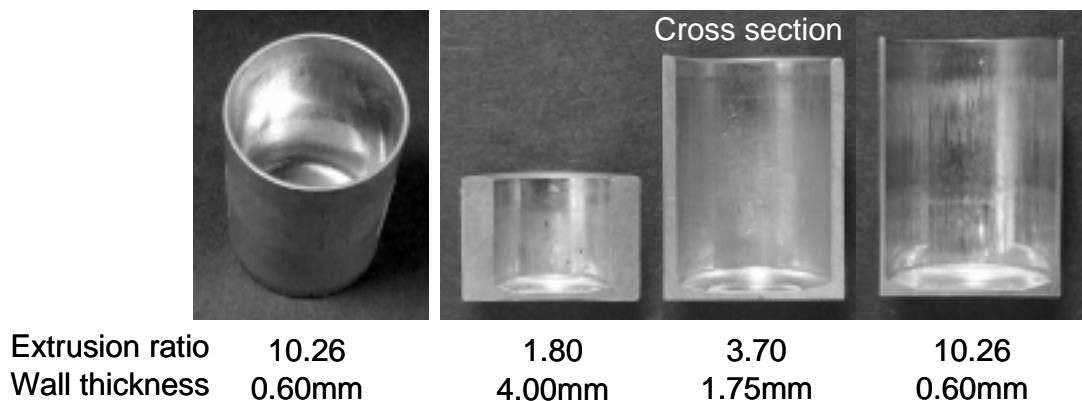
Extruded magnesium (ZK60) billets in backward extrusion on mechanical press without lubrication (forging temperature: 300°C, bottom thickness of cups: 1.0mm)
